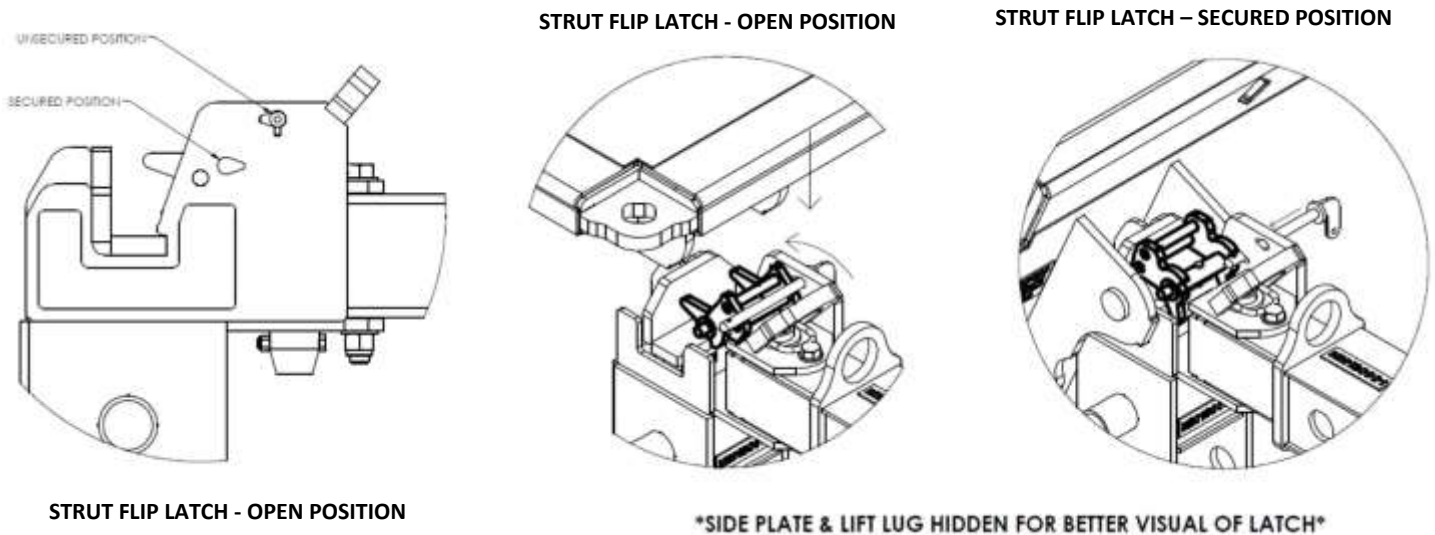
Assembly Step Three – Strut Flip Latch Operation
